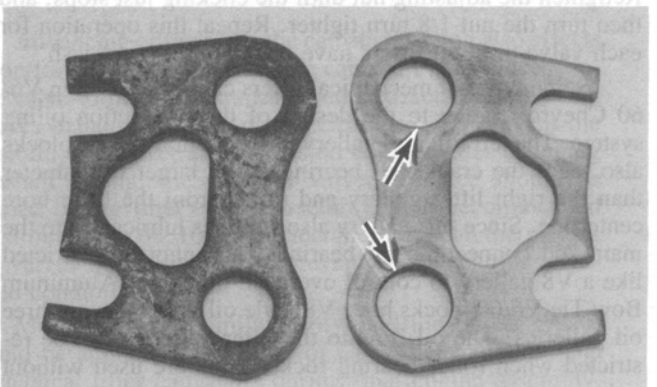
Stock V6/60 pushrod guideplate (left) fits 11mm rocker arm studs. Enlarge holes to fit 7/16-inch diameter studs.
